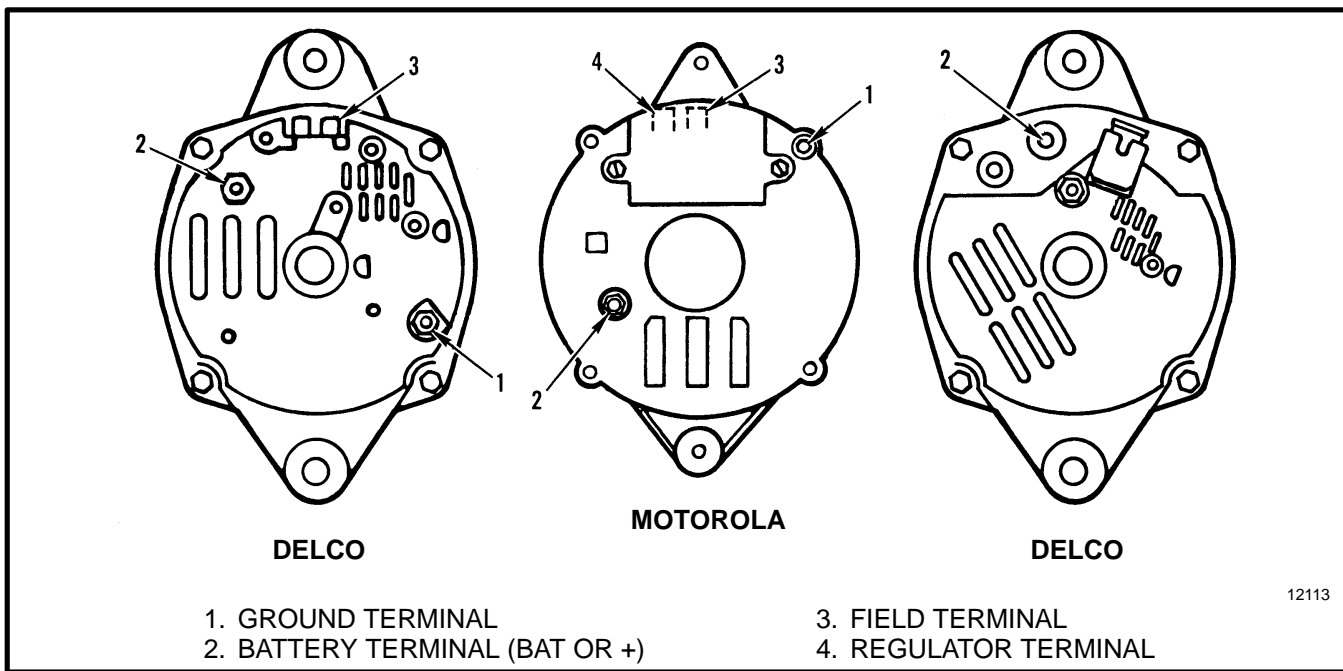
TYPE A ALTERNATORS, REAR VIEWS
